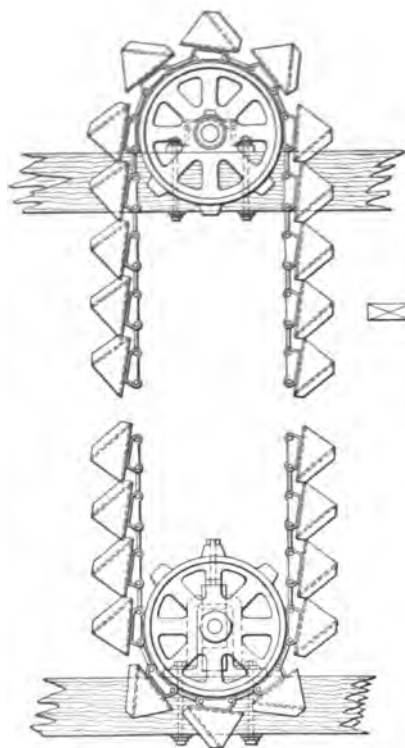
SIDE ELEVATION OF SINGLE STRAND ELEVATOR.
